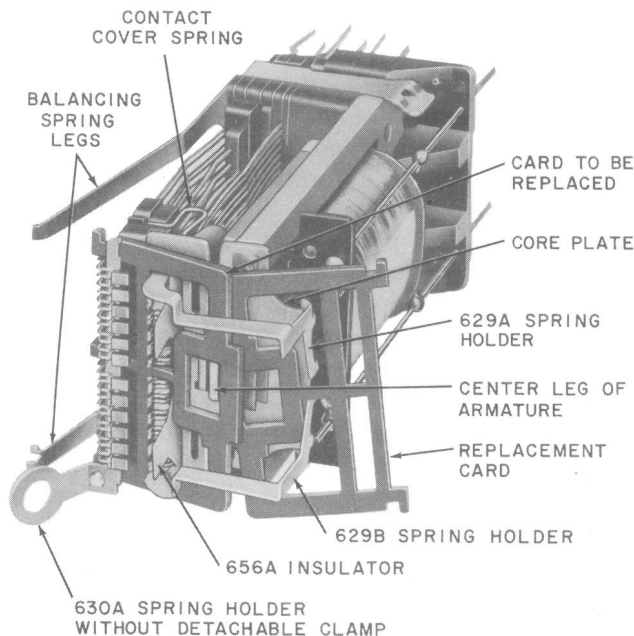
AL-Type Relay—Card Removal Tools Mounted in Place Except Detachable Clamp of 630A Spring Holder
